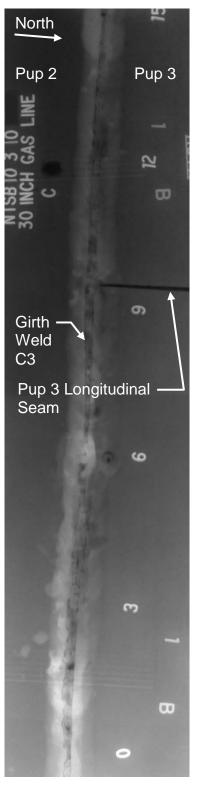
Radiograph of girth weld C3 from 0 inch – 15 inch (see Table B2) between pup 2 and pup 3. Part of the pup 3 longitudinal seam is visible.
